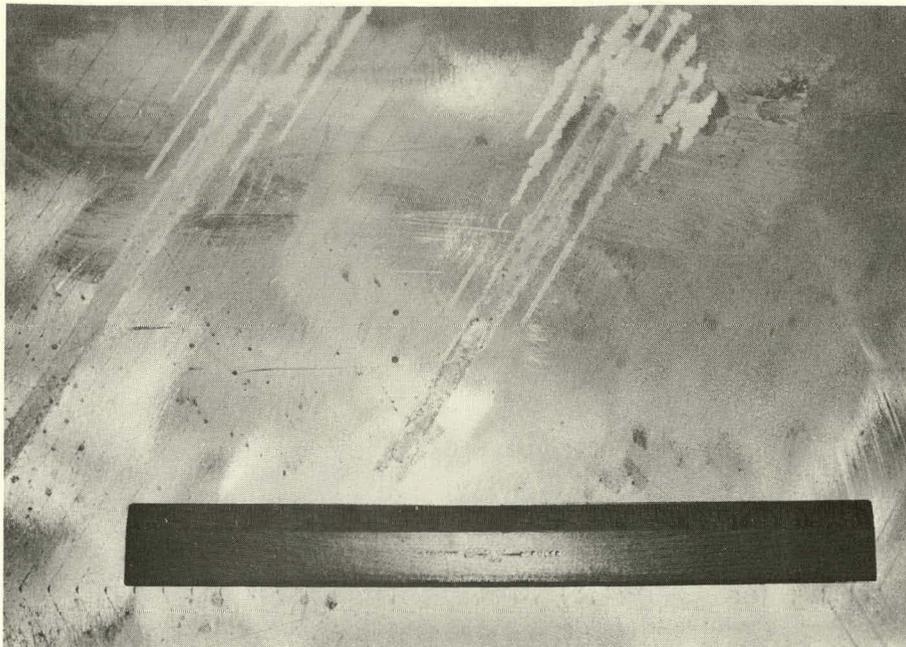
Appearance of Cover Sheet on Top of First Plate of Plate-type Heat Exchanger. Maximum depth of corrosion measured at 0.03 mm.
